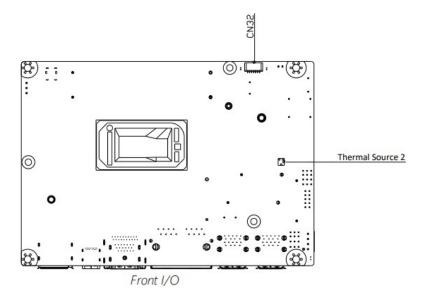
Jumpers and Connectors Location- Board Bottom
